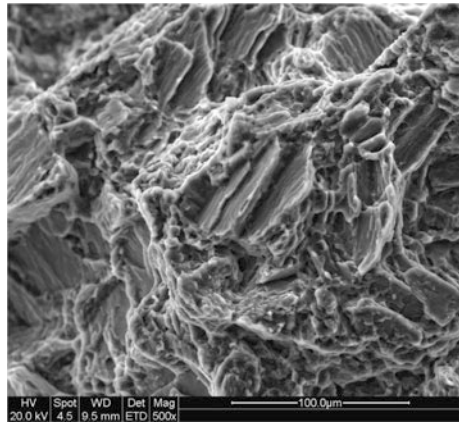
shows a typical fracture surface of the squeeze cast AZ91D specimens in as-cast conditions. Fracture surfaces are relatively smooth. A few tearing ridges and shallow dimples are observed on these fracture surfaces. Few tearing ridges are not enough to form cleavage rivers. Therefore, squeeze cast AZ91D magnesium alloy shows low room temperature ductility.
